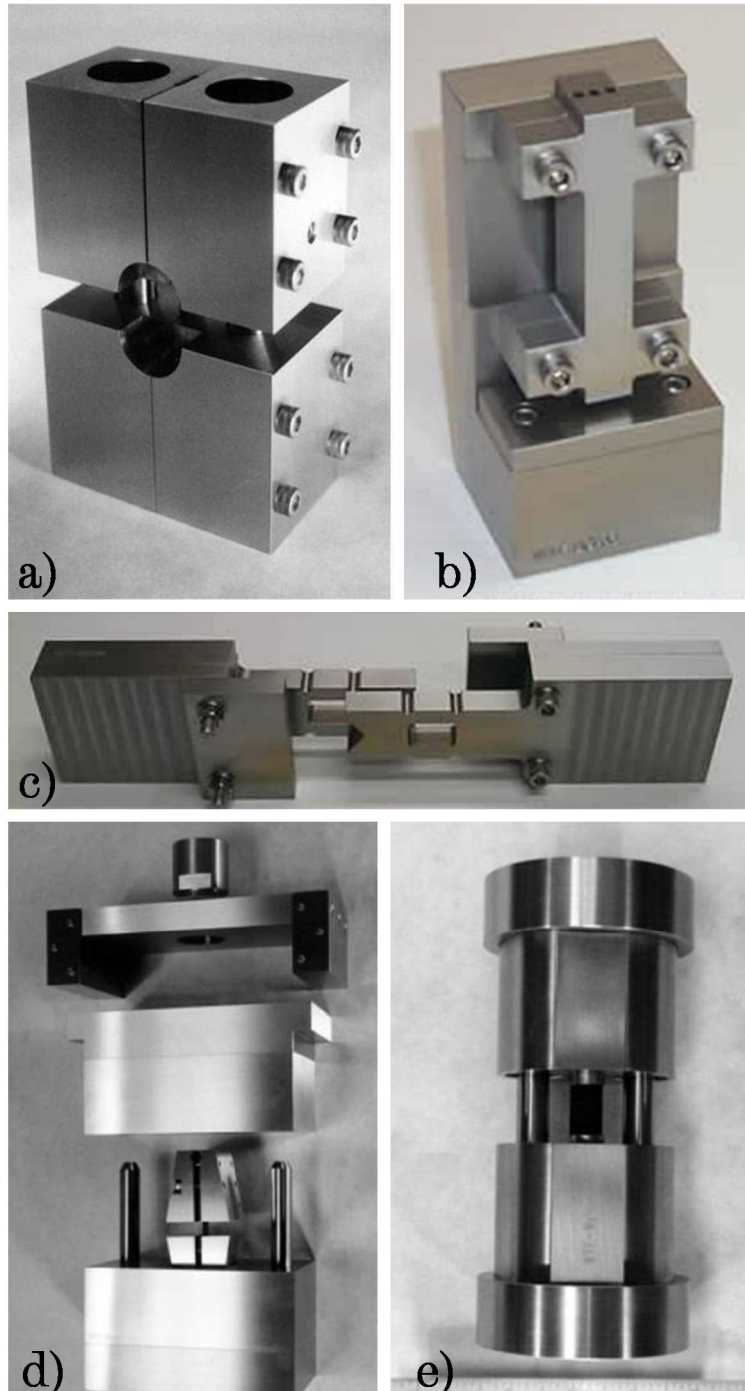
Conventional compression test fixtures²: a) CLC fixture as per ASTM D6641, b) Modified ASTM D695 fixture, c) OHC test fixture as per ASTM D6484, d) IITRI Compression Test Fixture as per ASTM D3410 and e) Wyoming Modified Celanese Fixture as per ASTM D3410.
